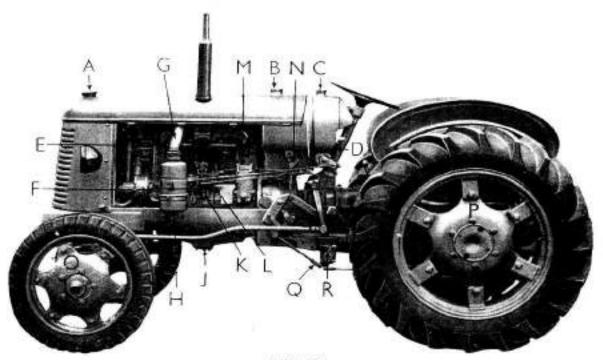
NEARSIDE VIEW OF D.B. 25 TRACTOR
